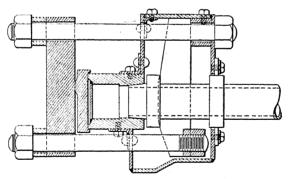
SECTIONAL VIEW OF UPPER MAIN HEADER, MERCURY BOILER
